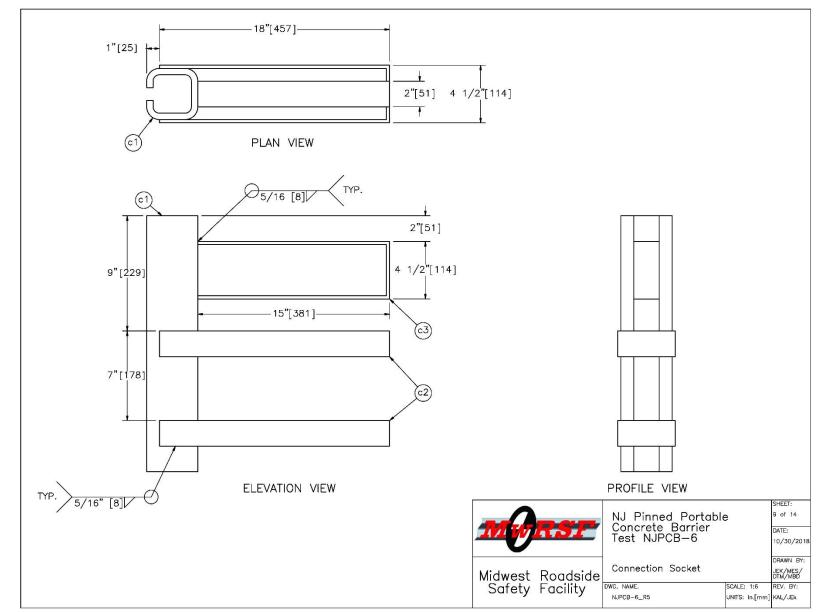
PCB Connection Socket Details, Test No. NJPCB-6
